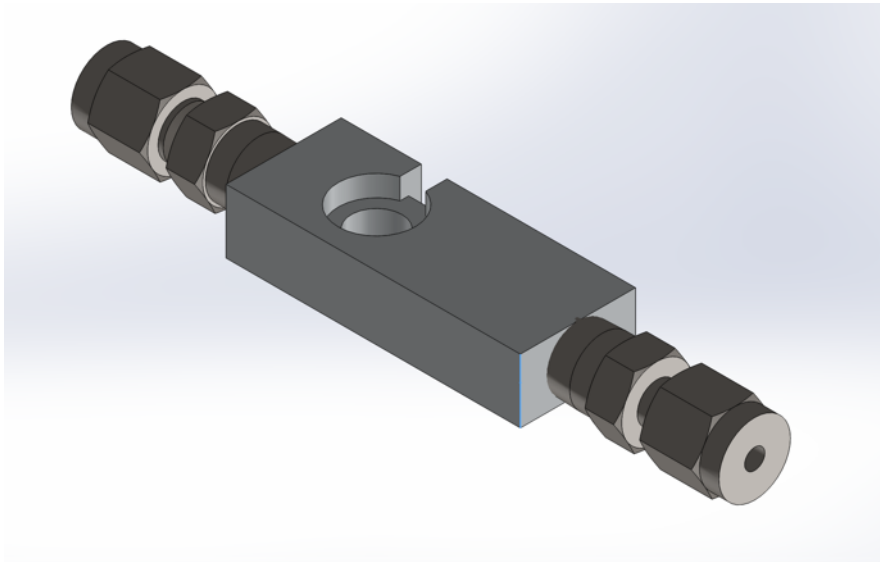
Design-3 showing UV bulb bore and 10-32 UNF inlet and outlet fittings volume and distance of travel between inlet and ionisation source were also reduced in to improve ionisation and detection. Additionally, a channel was machined to
